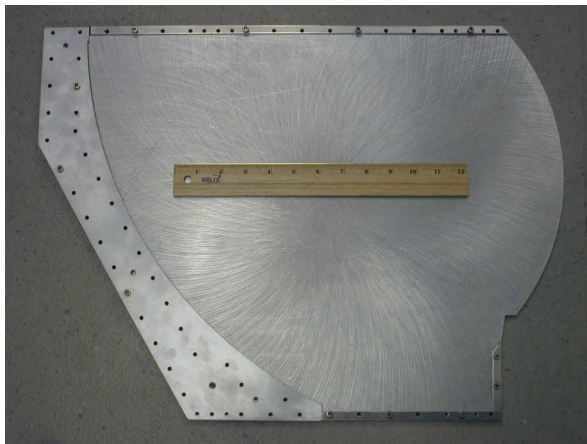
Z-Spec prototype grating with one plate removed. The blazed surface is on the left. Assembled, the grating is 56 cm \times 42 cm \times 2.25 cm. A 12-inch ruler is shown for scale. The input horn is attached on the lower right, just below the curved focal arc. The output feed can be attached anywhere along the arc on the right side of the plate. Lower frequencies are focused close to the input horn, with higher frequencies arriving higher along the curve.
